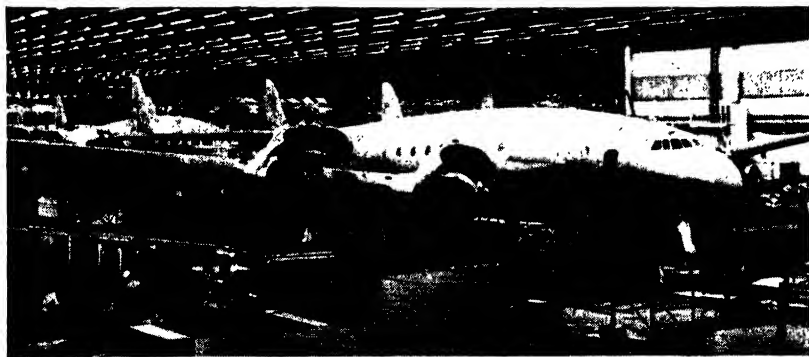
Assembly of Constellation. (Lockheed Aircraft Corporation.)
